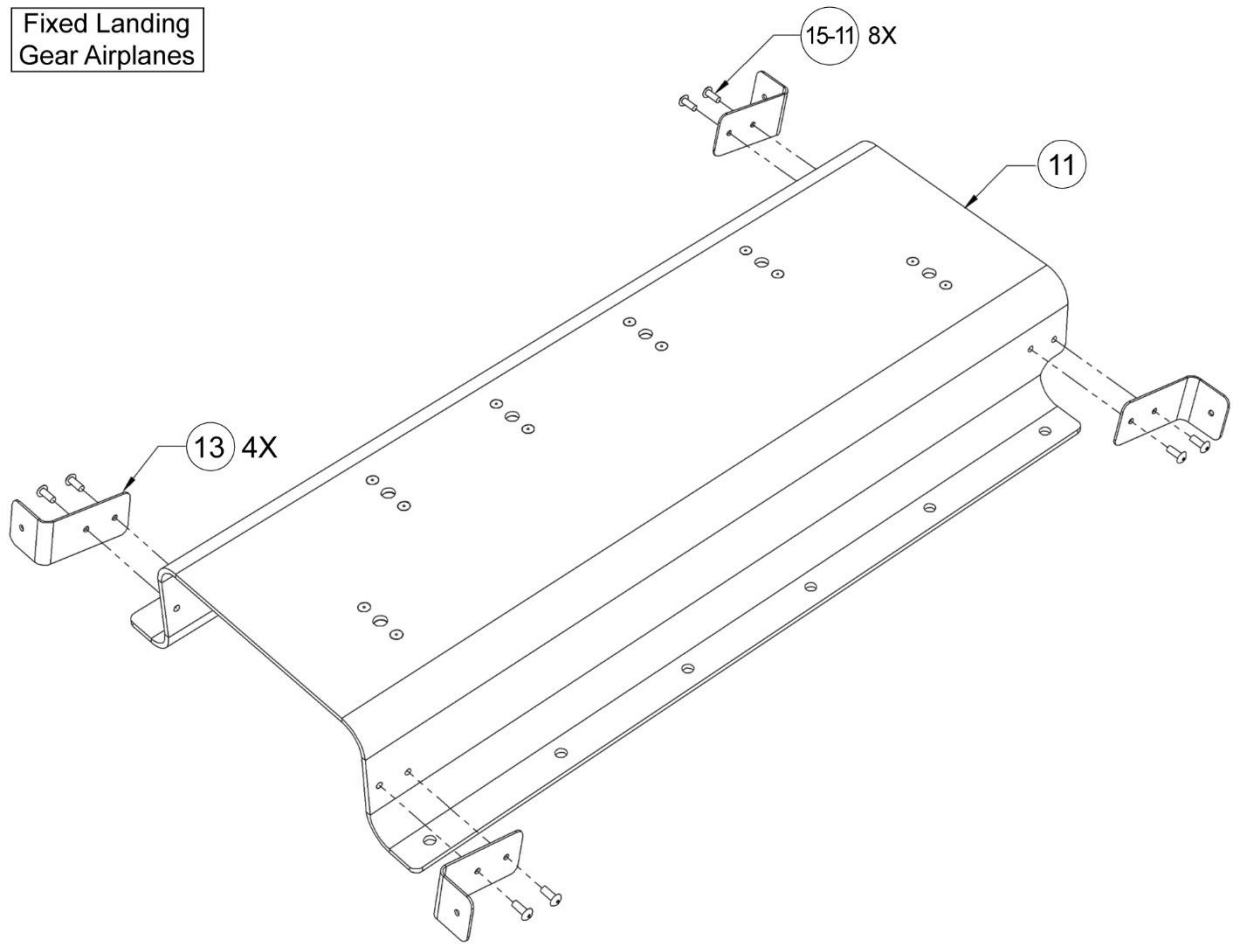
Riveting Pitch Servo Shear Clips to Base Bracket
